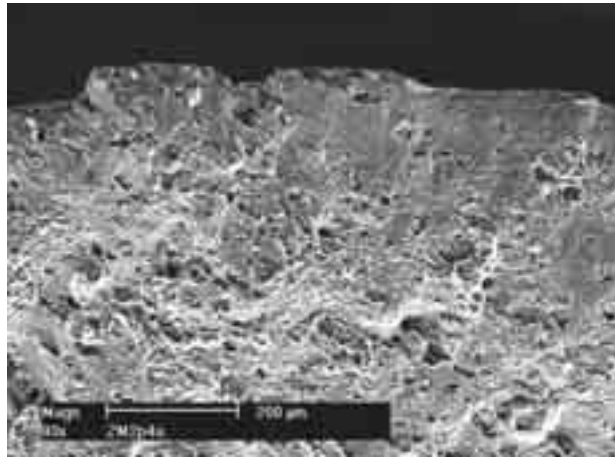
Fragment of fatigue fracture at the specimen's surface
